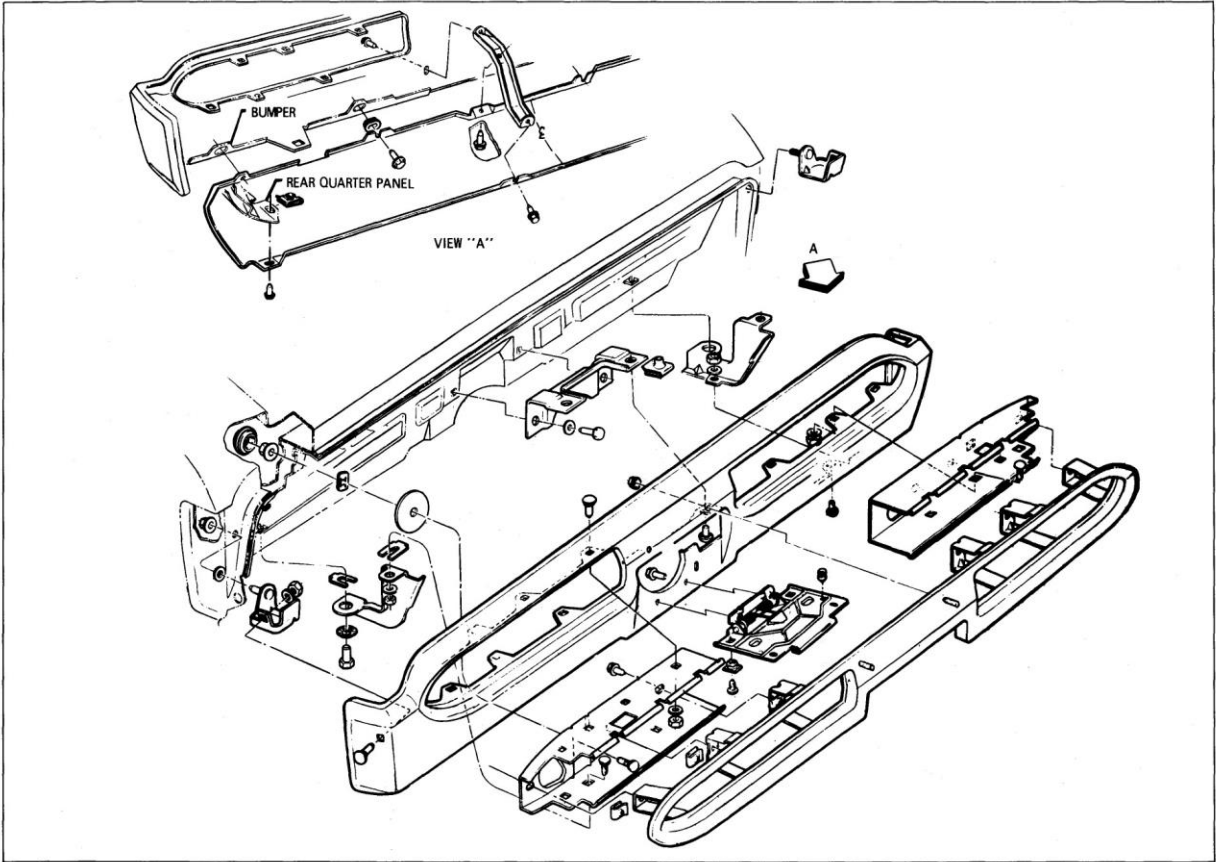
Pontiac Bonneville Rear Bumper Assembly
